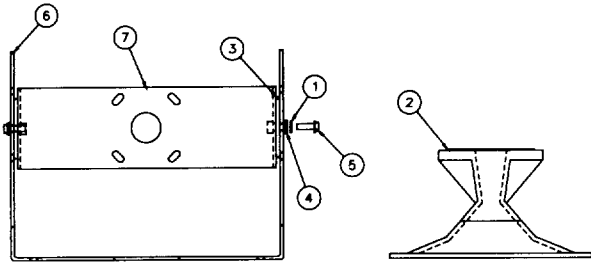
Mounting the HMK-4's U-Bracket Between the Driver and Horn
